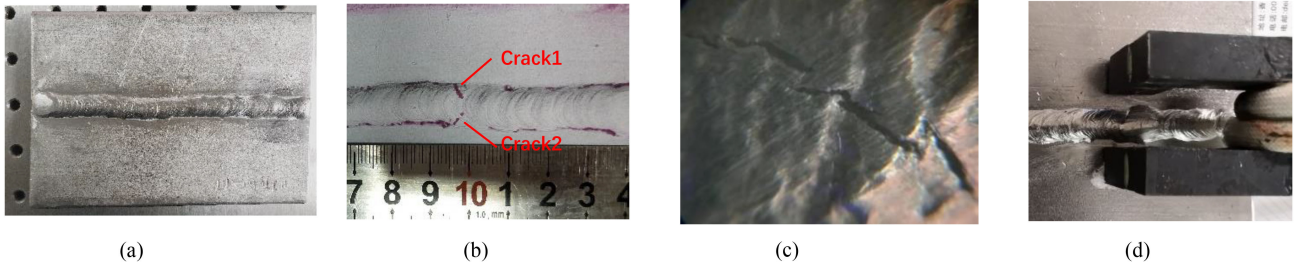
Description of weld specimen and the surface natural cracks. (a) Picture of weld. (b) PT results of weld cracks. (c) Amplified result of crack1 (60×). (d) Detection position.
